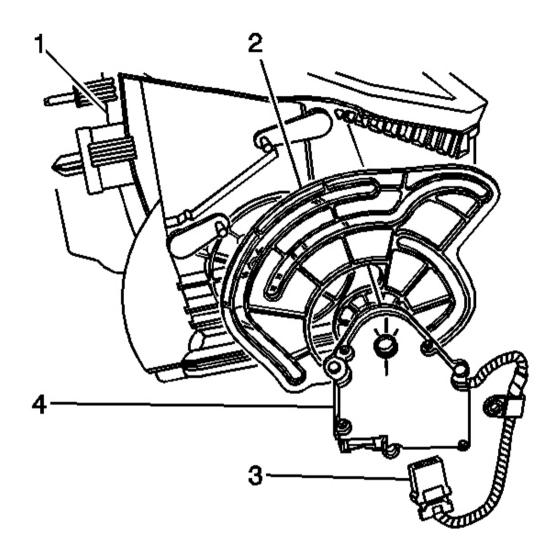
Mode Actuator Courtesy of GENERAL MOTORS CORP.
